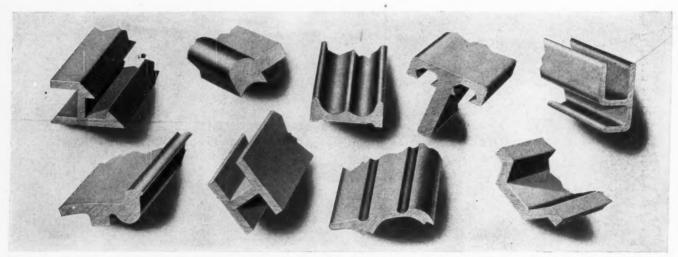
Parts requiring intricate contours may be produced economically by the extruded process.
